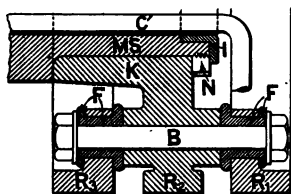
B.—Mounting of Slip-Rings on Shaft (Bruce Peebles Motor).
